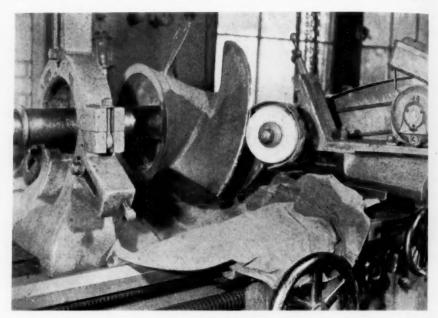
24-Inch Mix-Flow Impeller; showing finish grinding of outside edges after building up with stainless steel
